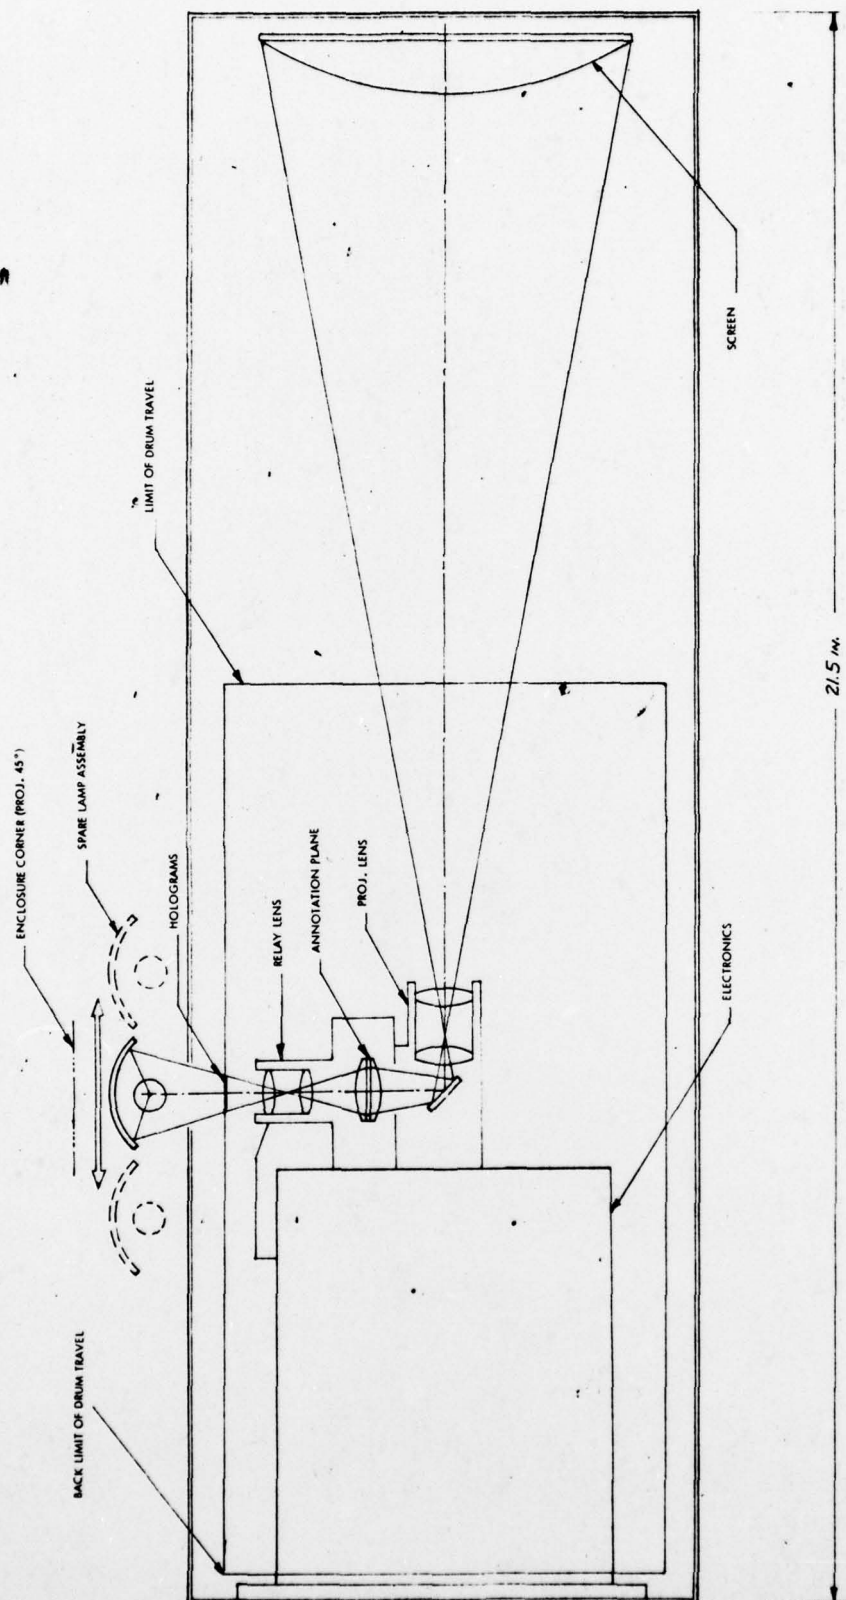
(a) Side View of ZOD reader using size reduction techniques to achieve a 7 in x 7 in x 21.5 in package.
